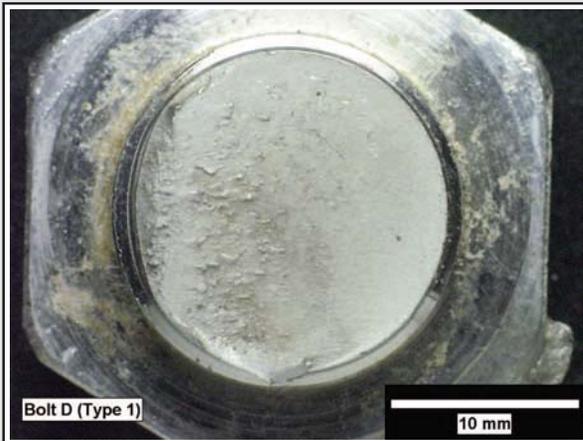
Fracture surface of bolt D (type 1 bolt)
